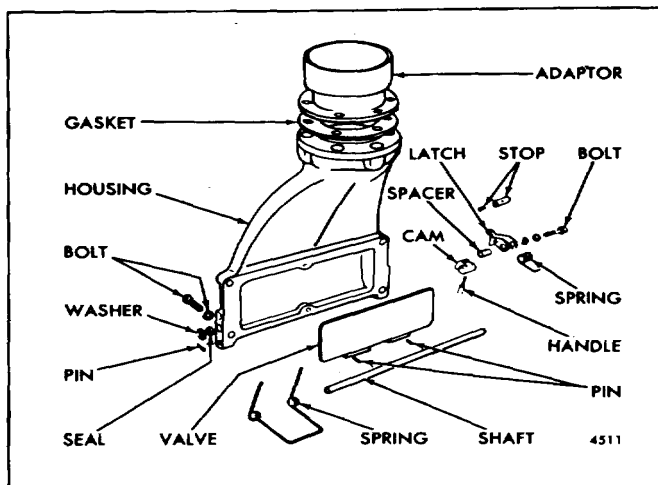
Typical Air Shut-down Housing Detail and Relative Location of Parts
